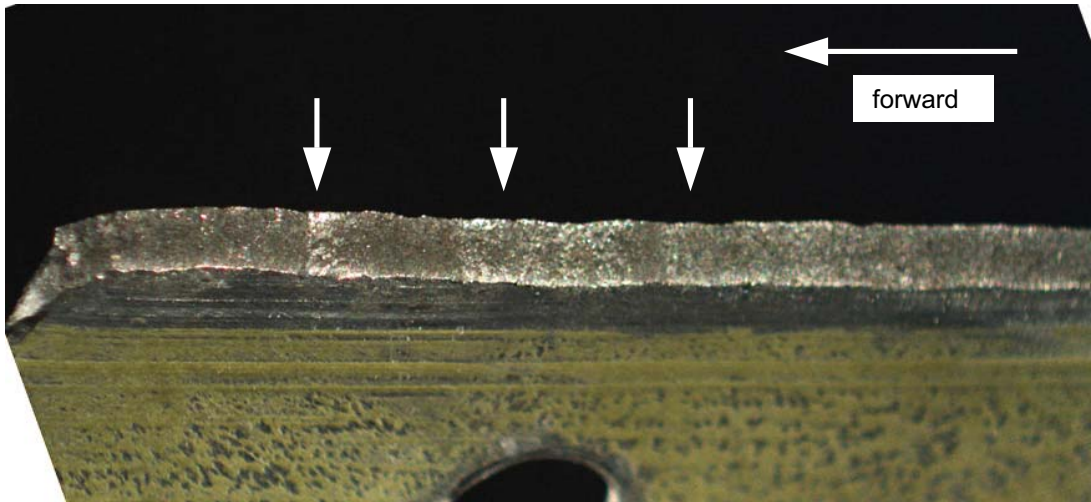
, Photograph showing the incremental crack growth indications (arrows) on the fracture segment near Hole 7, which is between the two main fatigue cracking systems at Holes 4 and 5 and Holes 10 through 25.
